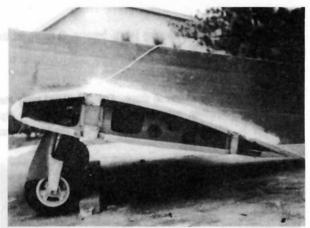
Profile of center wing foam. Note trailing scarf joint.
